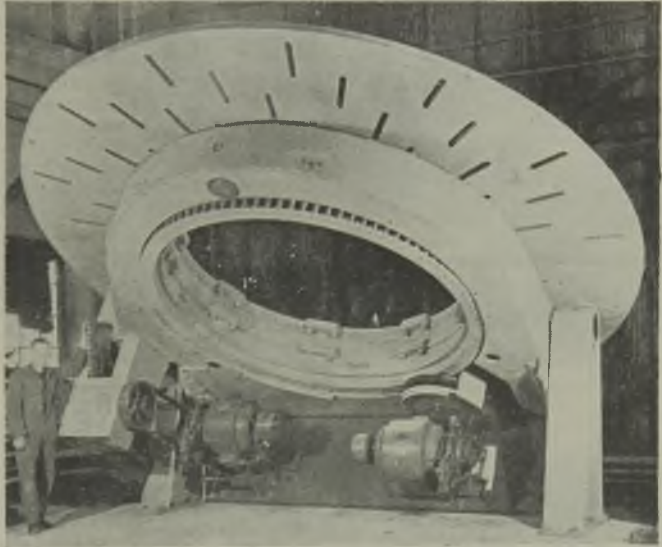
Welding manipulator, showing clamping table with rotating and tilting motors
